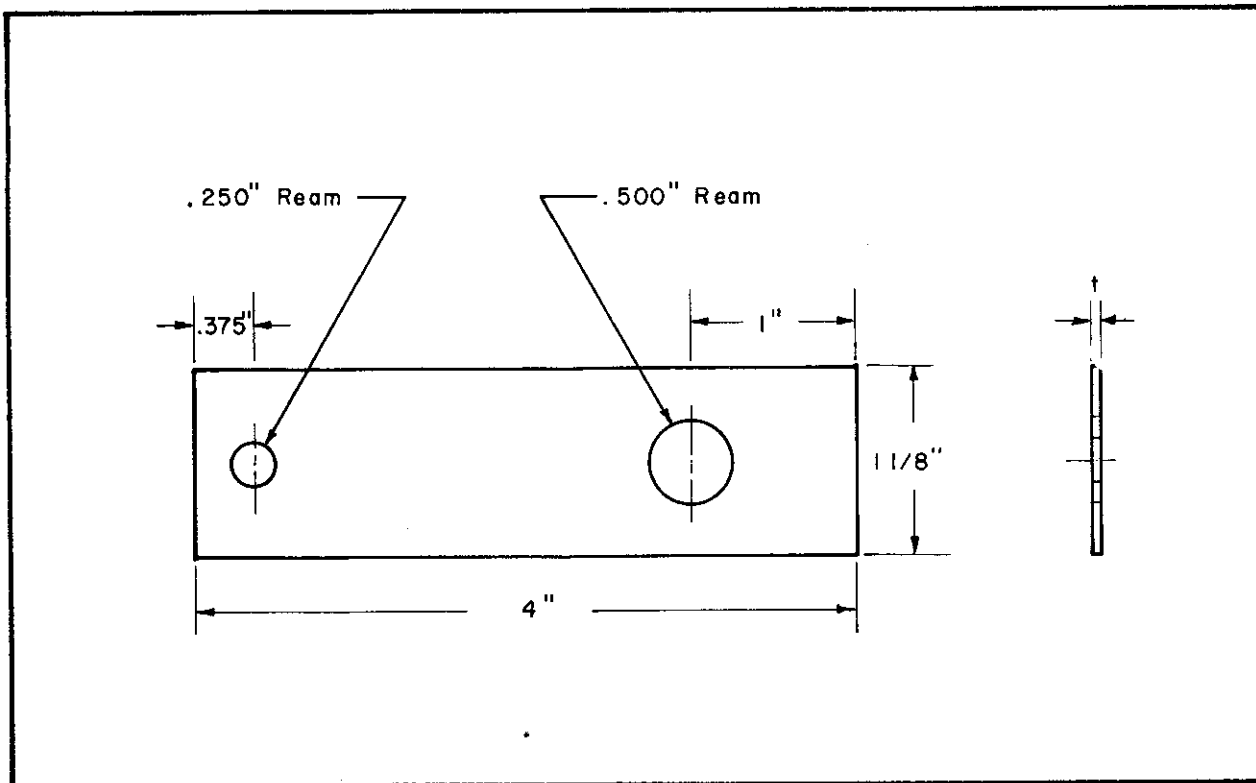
Sheet Bearing Test Specimen, Bearing Ratio $e/D = 1.5$
